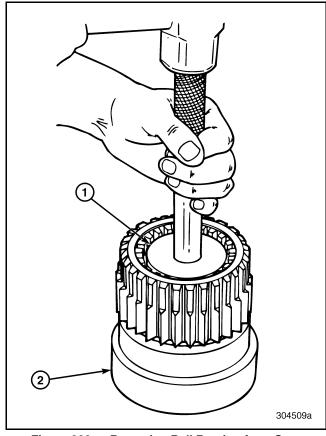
Removing Ball Bearing from Gear (T313L/T318L Shown)
